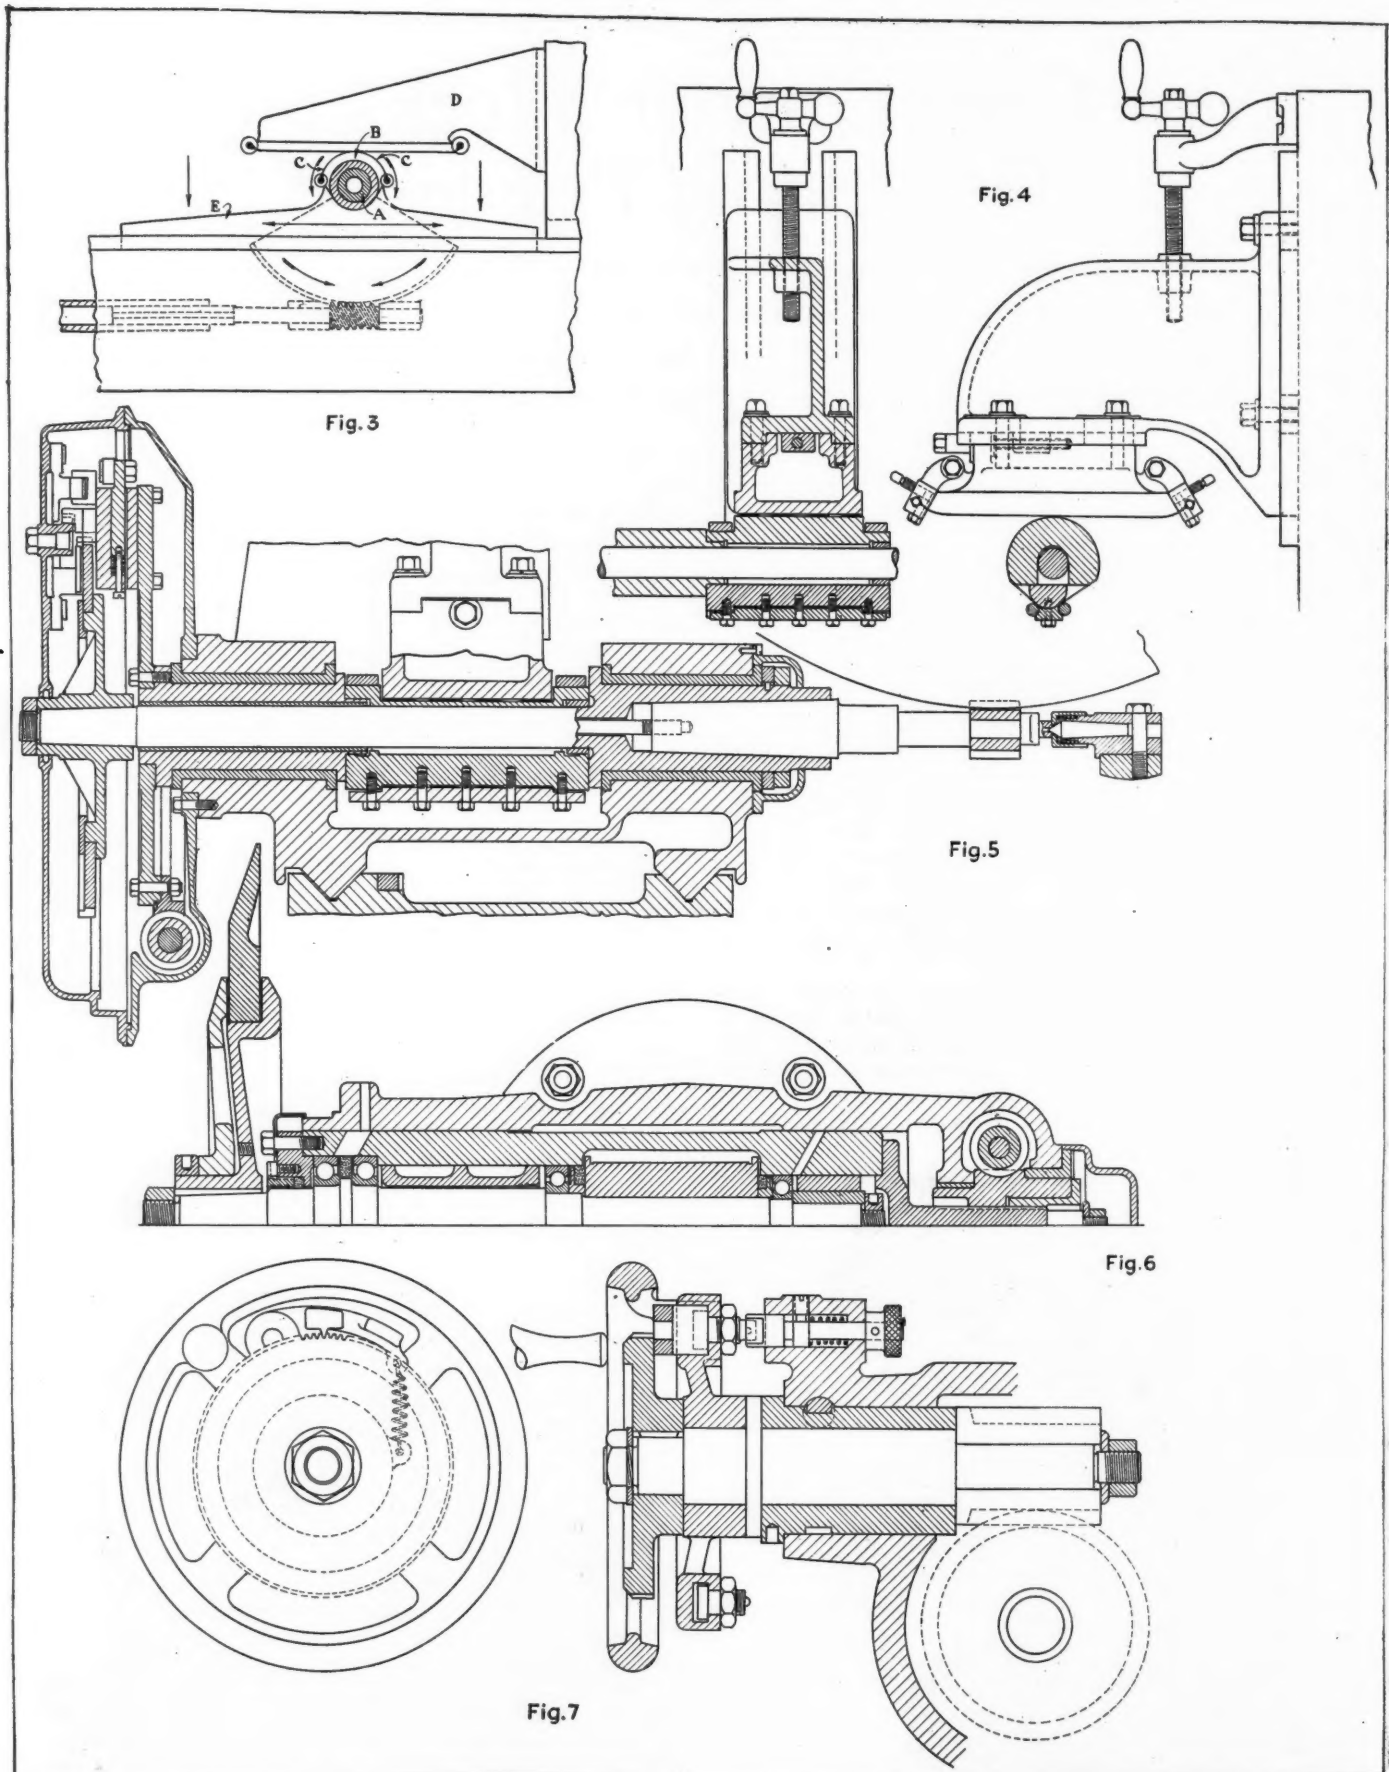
Diagram of the mechanism for producing the combined rotary and sliding motion for gear generation. Fig. 4—Method of mounting bracket adjustably on column and securing tapes to tape bar. Fig. 5—Section through work spindle showing method of driving work arbor, construction of tailstock and work mounted on arbor (gear pinion). Fig. 6—Section through grinding wheel spindle. Note the driving pulley in the center, the method of mounting the wheel on left, and worm and wheel micrometer adjustment for grinding wheel at right. Fig. 7—Micrometer adjustment for grinding wheel, used in dressing wheel and for setting for rough and finish cut
